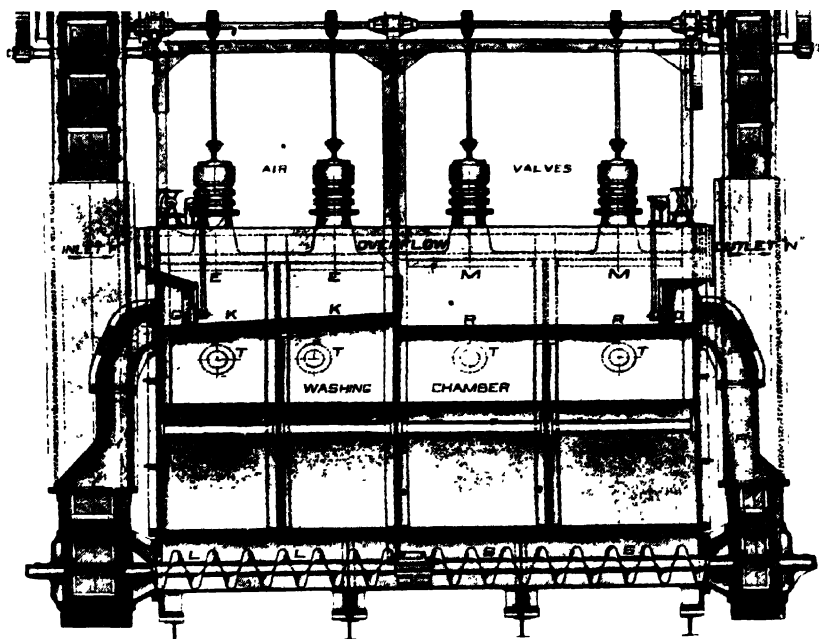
Sectional Elevation of Baum Wash-box (Simon-Carves).
